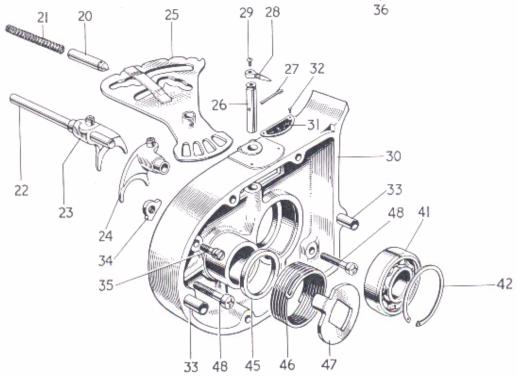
GEARBOX SHAFTS, BEARINGS AND INNER COVER
